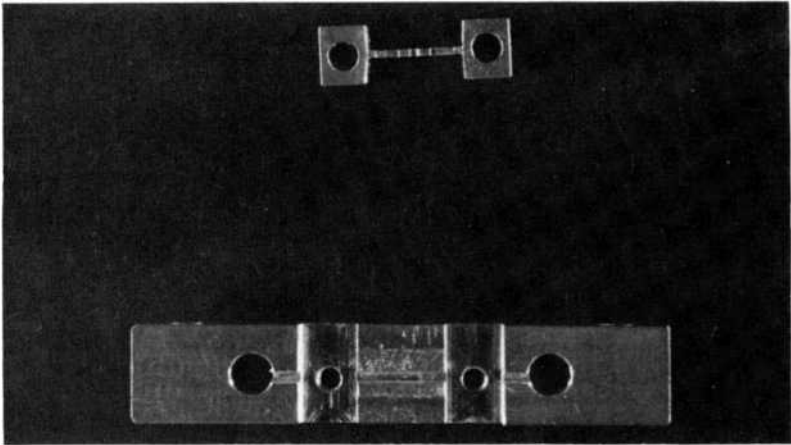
Chip carrier (above) mounted on amplifier fixture (below).
